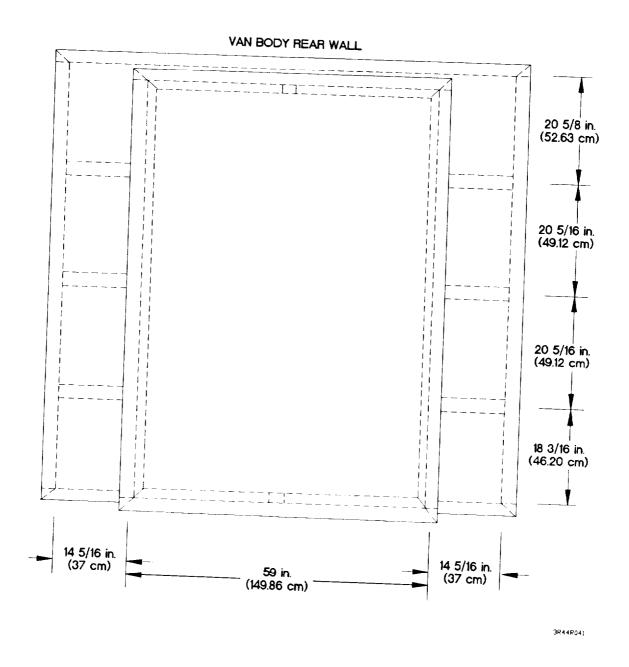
M1079 Van Body Interior Accessory Mounting Hardpoints.
